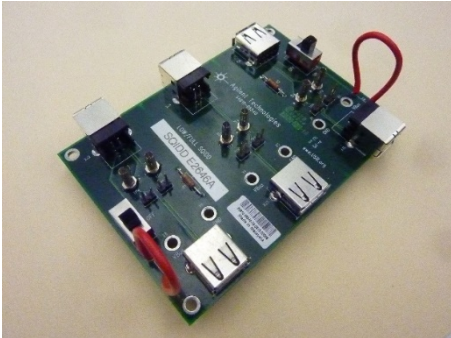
E2646B “SQuIDD” test fixture for testing USB 2.0 low- and full-speed products.
